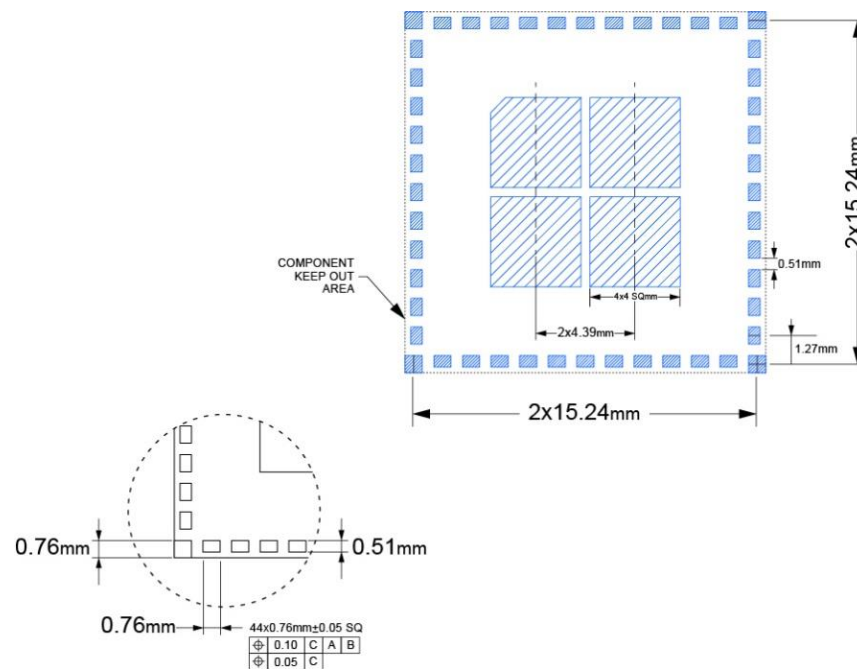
MQM744/748-0-50-0U Module PCB Landing Pattern
